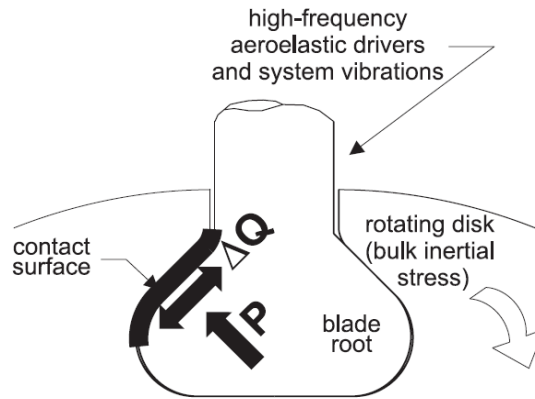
Illustration of the typical fretting fatigue contact configuration present at the dovetail notch of blade disk components in rotating aircraft engines [2].
